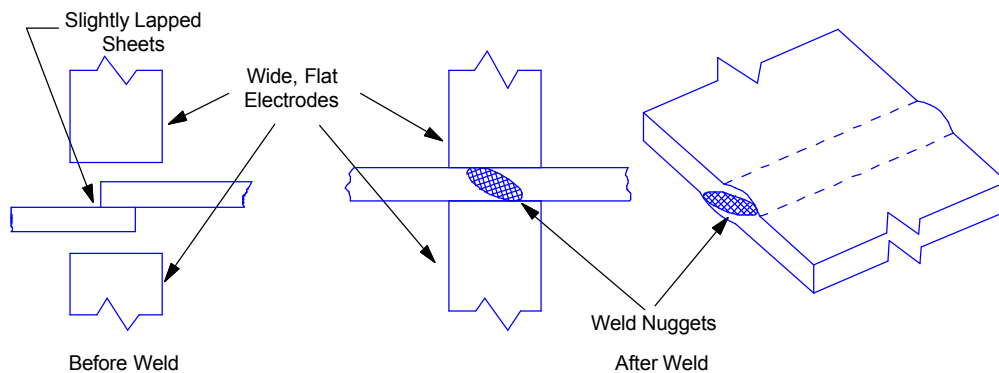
The resistance roller mash lap seam welding process
